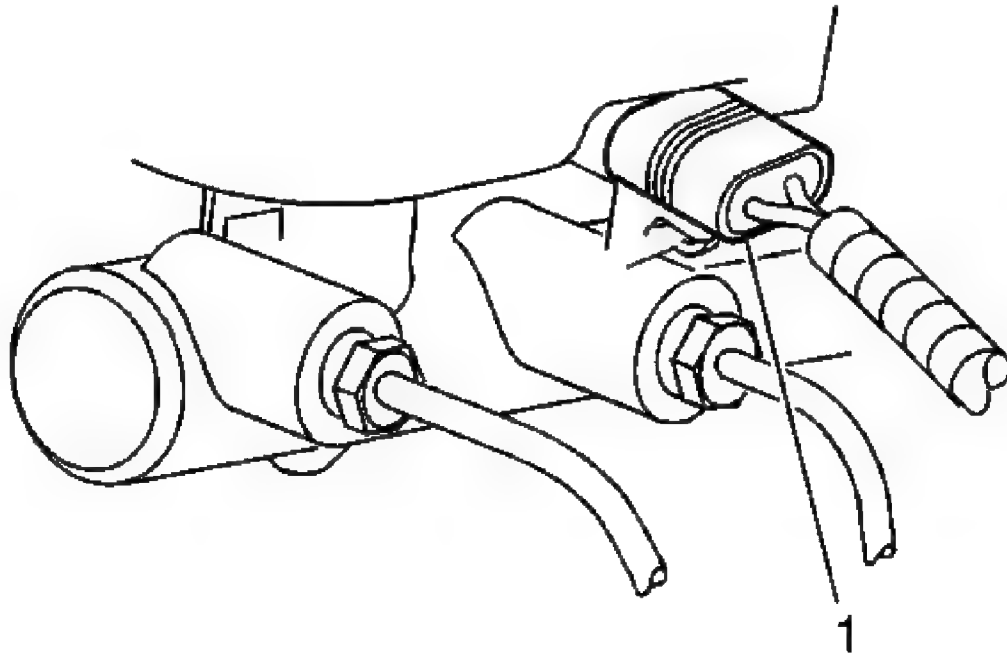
View Of Brake Fluid Level Sensor Electrical Connector
